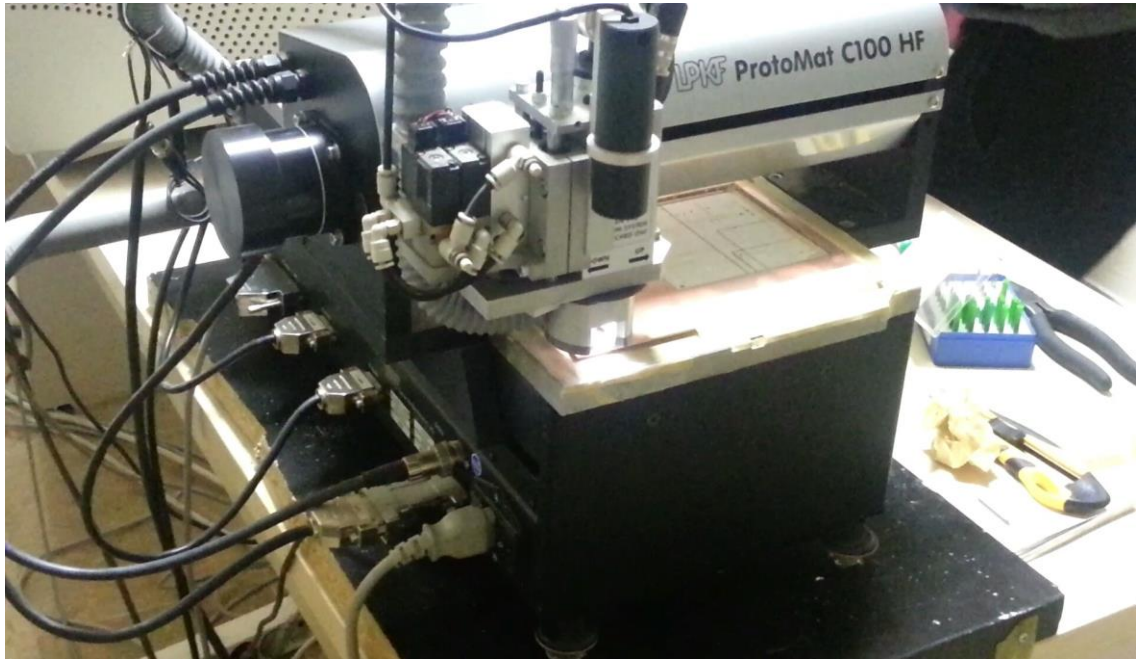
LPKF ProtoMat C100/HF PCB Machine
